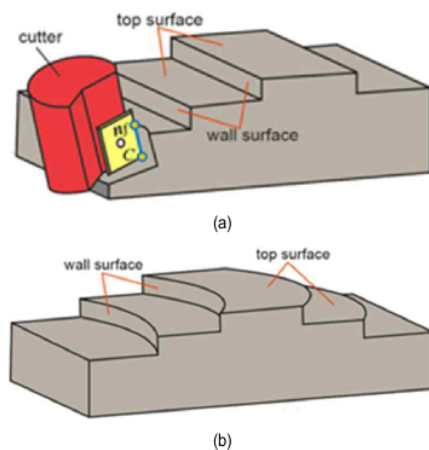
Typical illustration of a workpiece surface from rough milling: (a) Straight; (b) nonstraight staircase.
